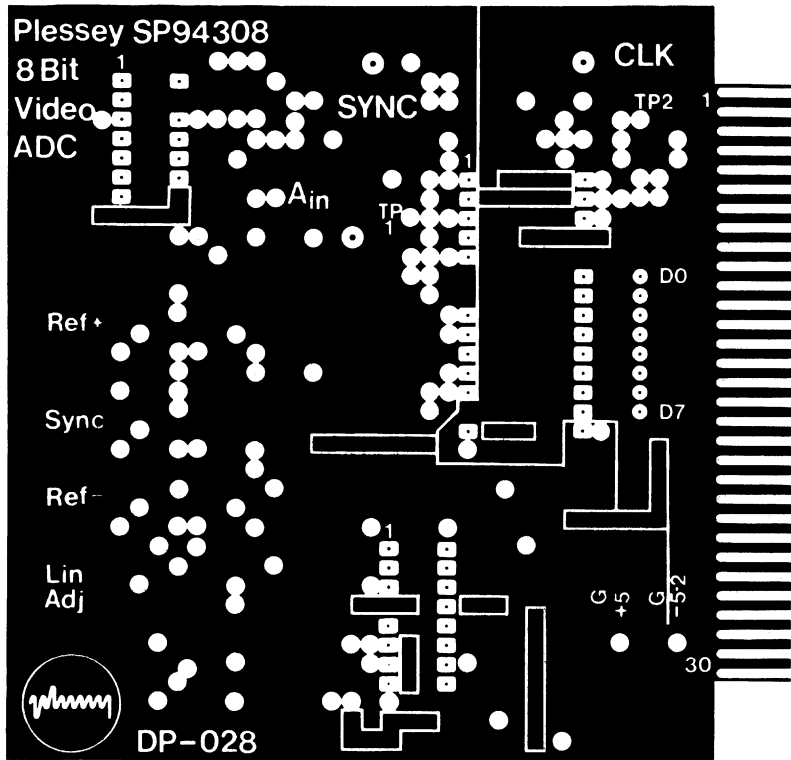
(b) AP9007 PCB ground plane and component side (1:1)
